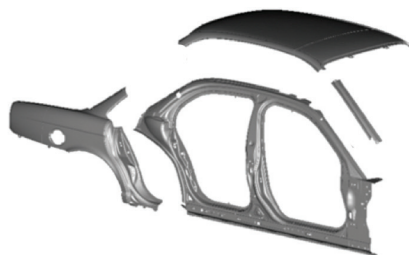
Three-piece body side panel with two cosmetic joints to the roof.
